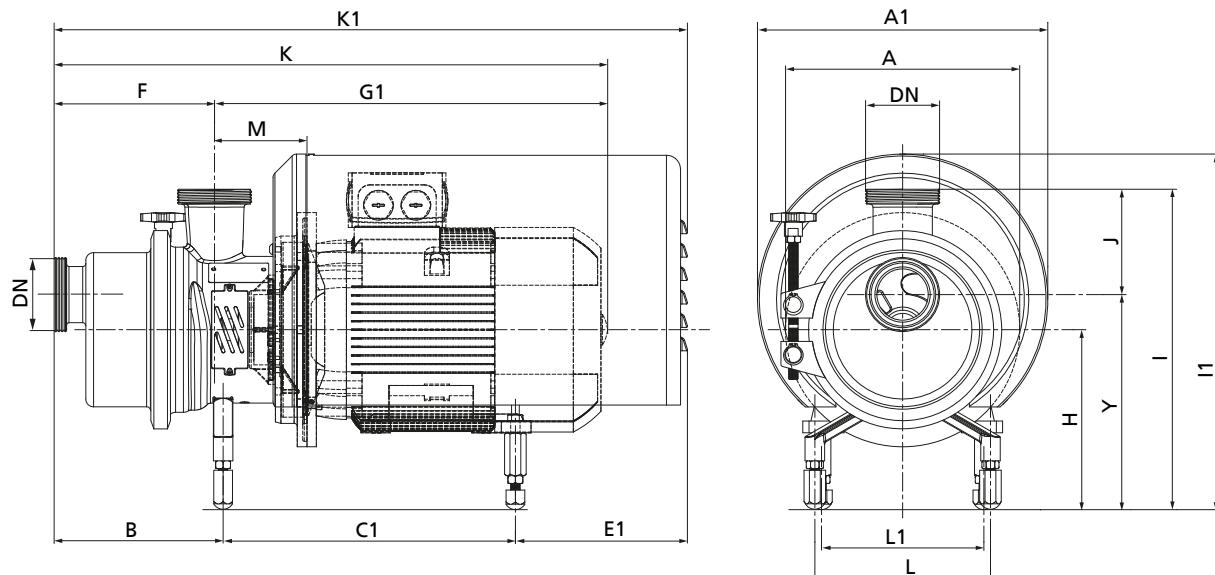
Pump set with motor shroud, with 4-point ball feet
